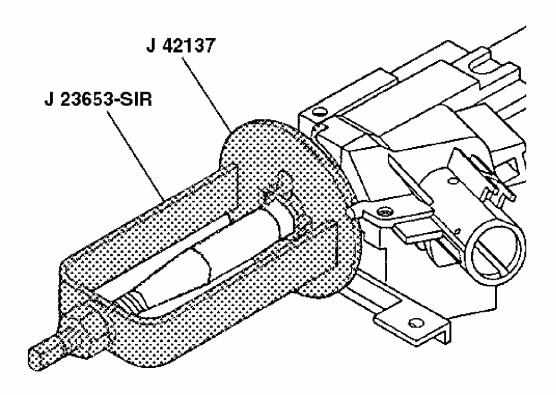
Compressing Cam Orientation Plate Using J 23653-SIR & J 42137 Courtesy of GENERAL MOTORS CORP.
